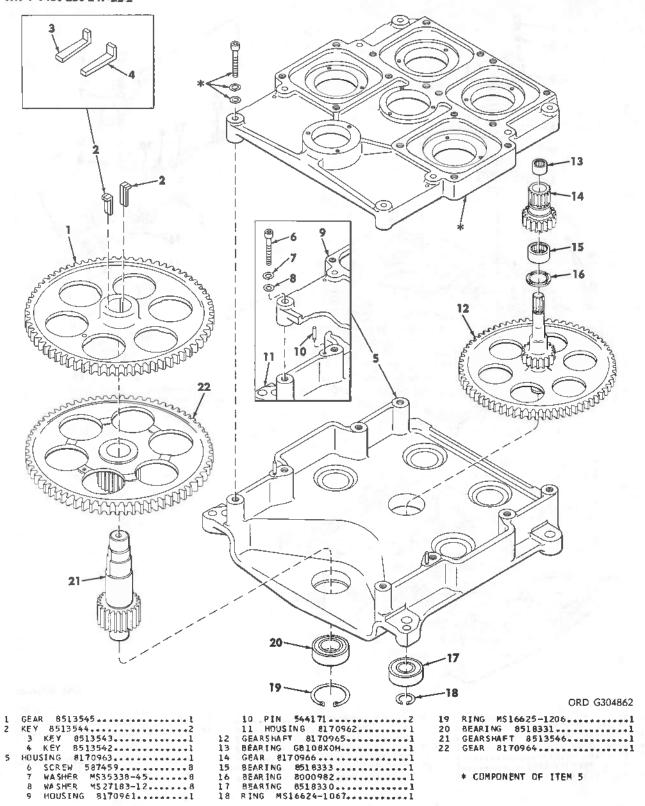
DRIVE /8170973/-PARTIAL EXPLODED VIEW
